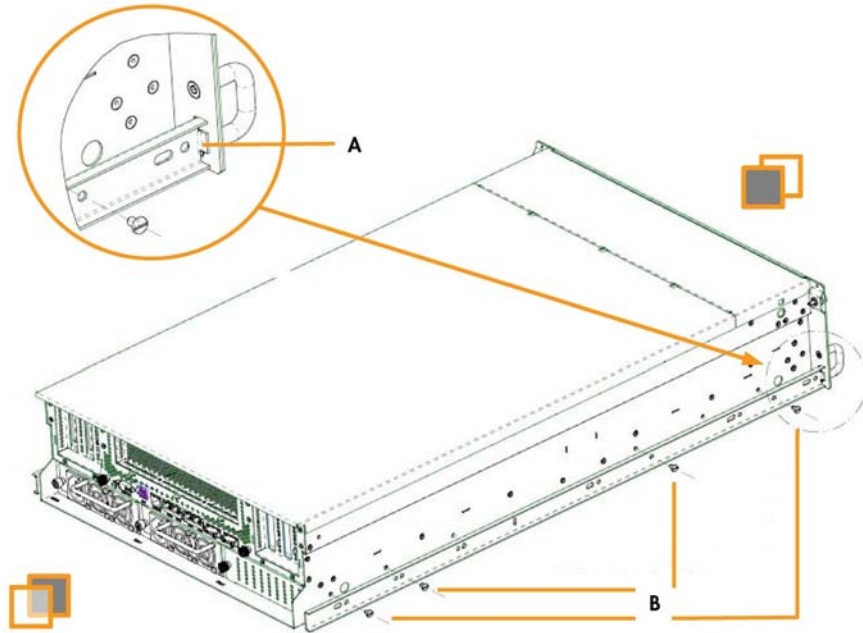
Slide rail assembly: Disassembling the drawer and rack rails
